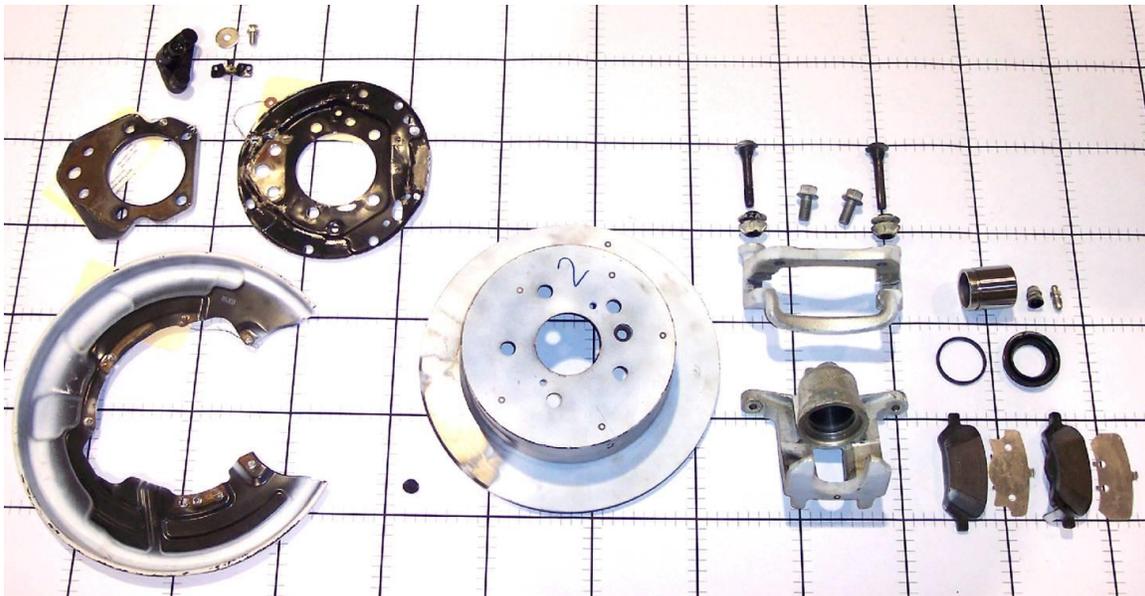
Rear Rotor / Drum and Shield Subsystem Current Major Components
